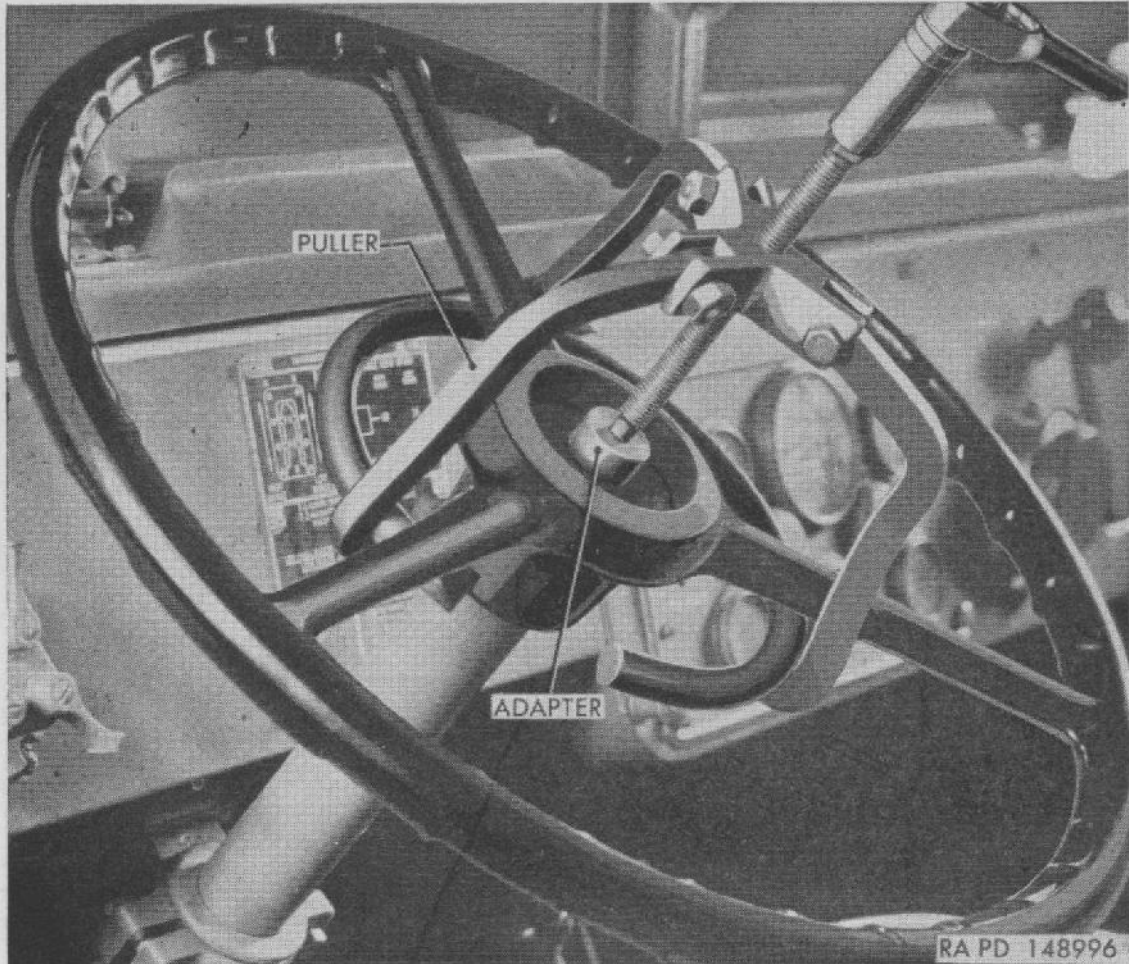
Removing steering wheel with puller 41-P-2954 and adapter 7950054.
